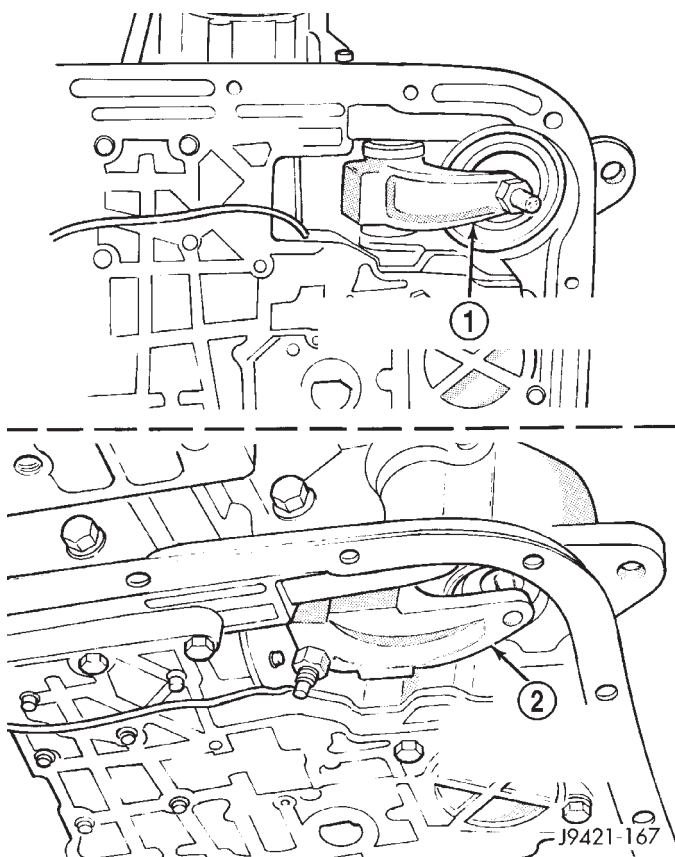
Front Band Adjusting Screw Lock Nut
